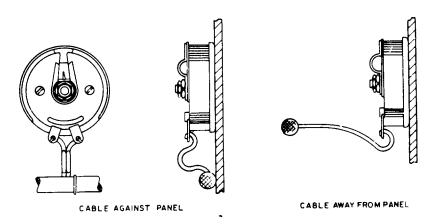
Rheostats — Small Radio Type — No. 14 Gauge and Smaller Wires
